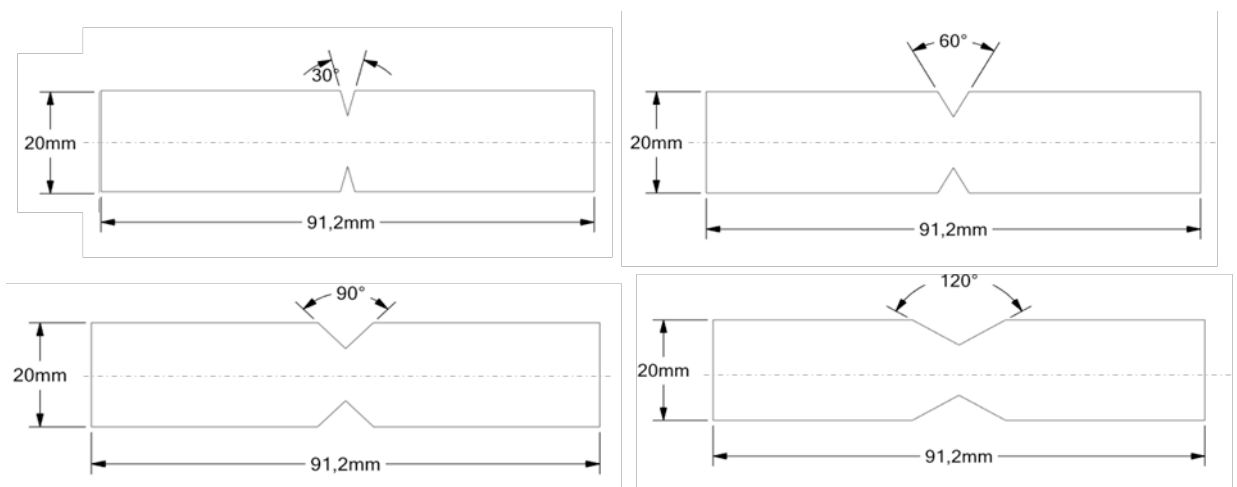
Geometries of the test V-notched specimens tested under tension. All specimens are 4 mm thick.
